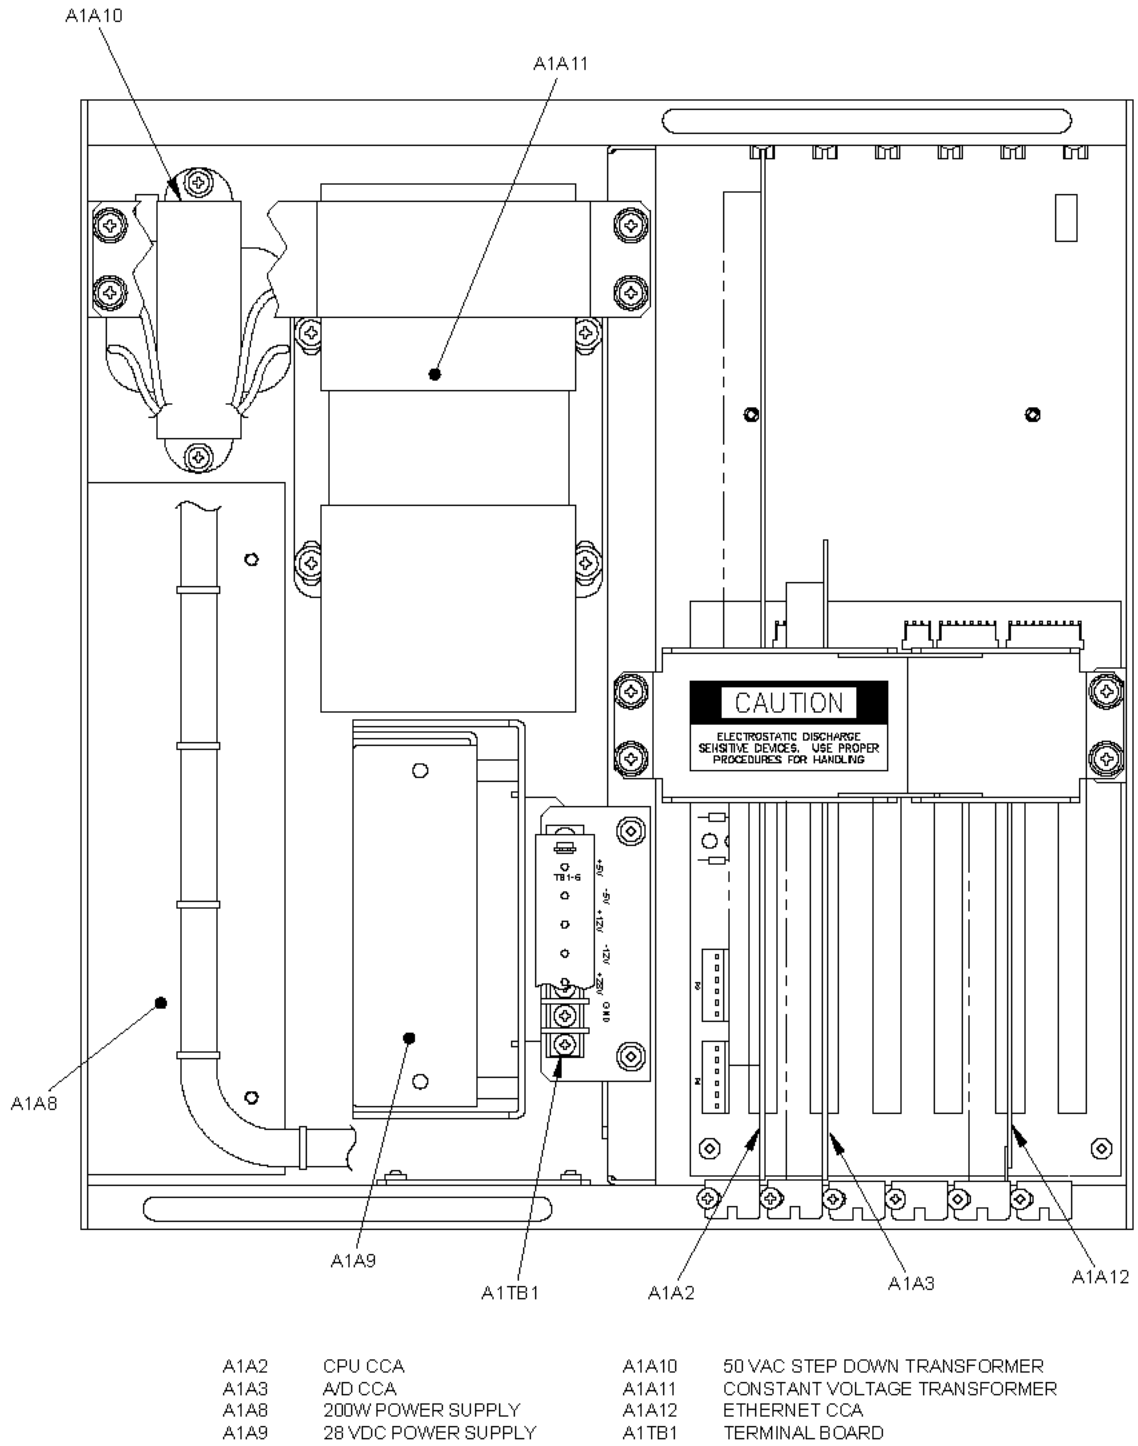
Power Supply/Card Cage Assembly (A1), Exploded View (Sheet 3)
